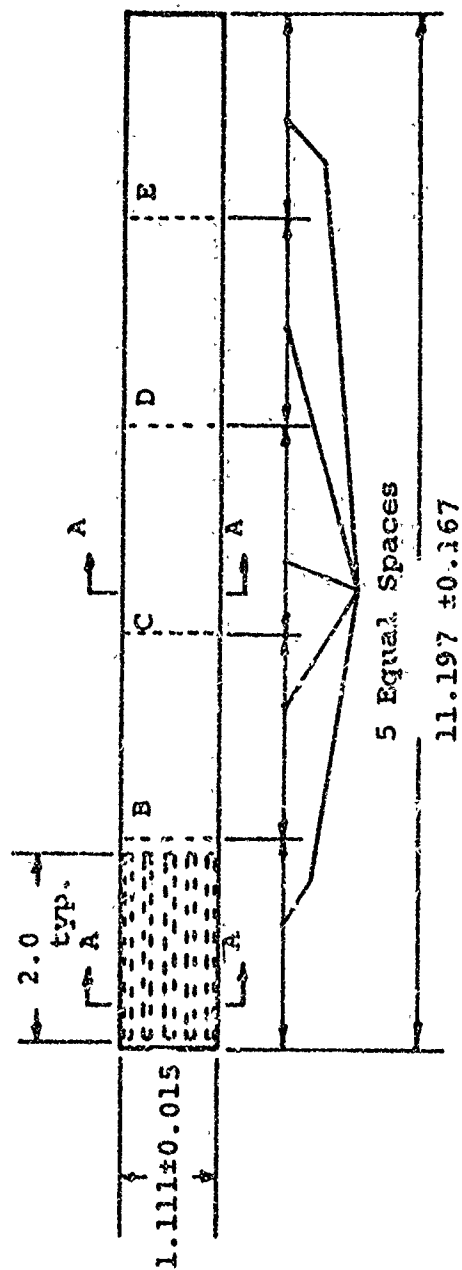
Cutting Plan - Specimen Blank 4A11-112
